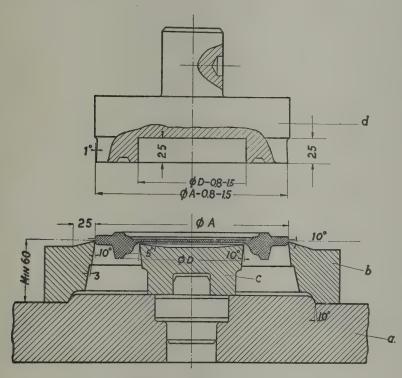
Combined trimming and piercing tool designed for hot work: (a) Base of the tool; (b) Trimmer blade located by tapered recess; (c) Piercing punch located on the peg; and (d) Main punch
